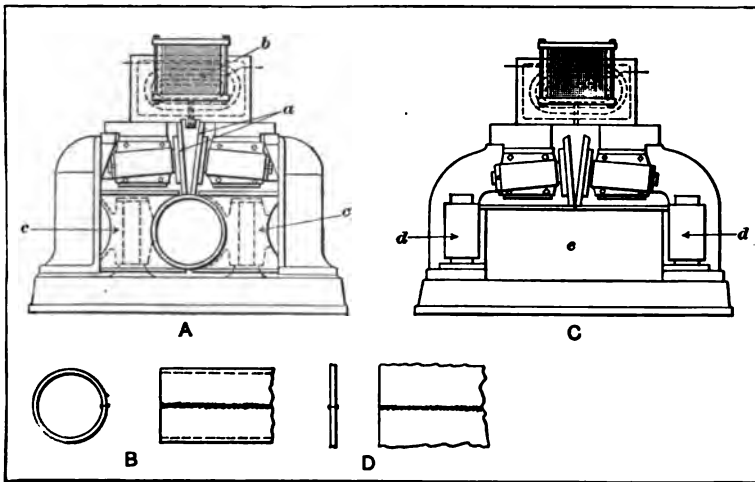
Diagram illustrating Two Types of Butt-seam Welders built by the Thomson Electric Welding Co.
